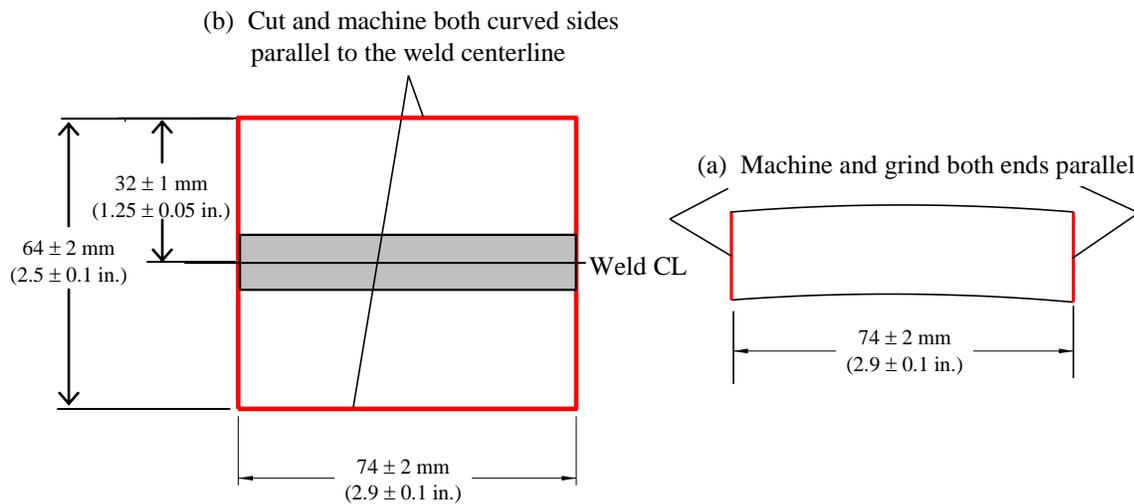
AWM strip tensile blank, (a) elevation view and (b) plan view showing weld cap on OD
